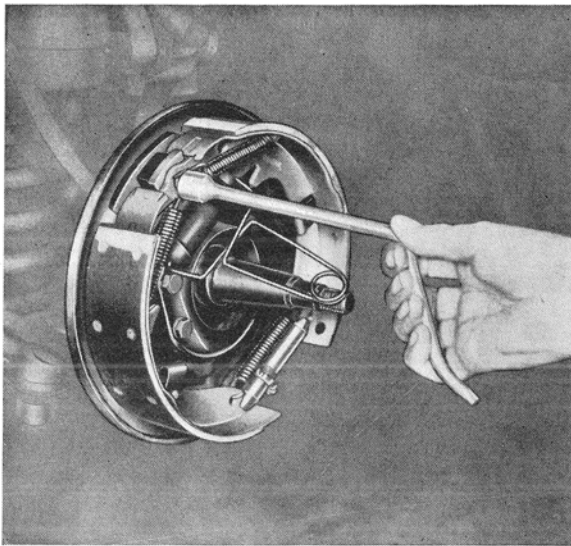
Removing the return spring with brake spring tool (Snap-on BT 11 or corresponding)
